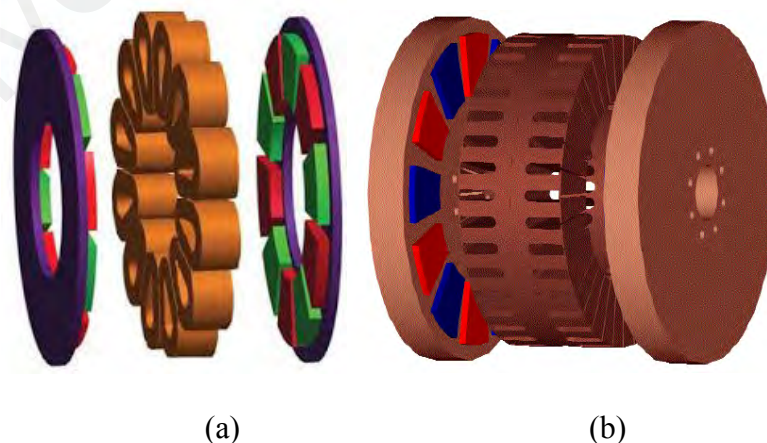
(a) Double-sided AFPM machine. (b) “TORUS” type AFPM machine.
